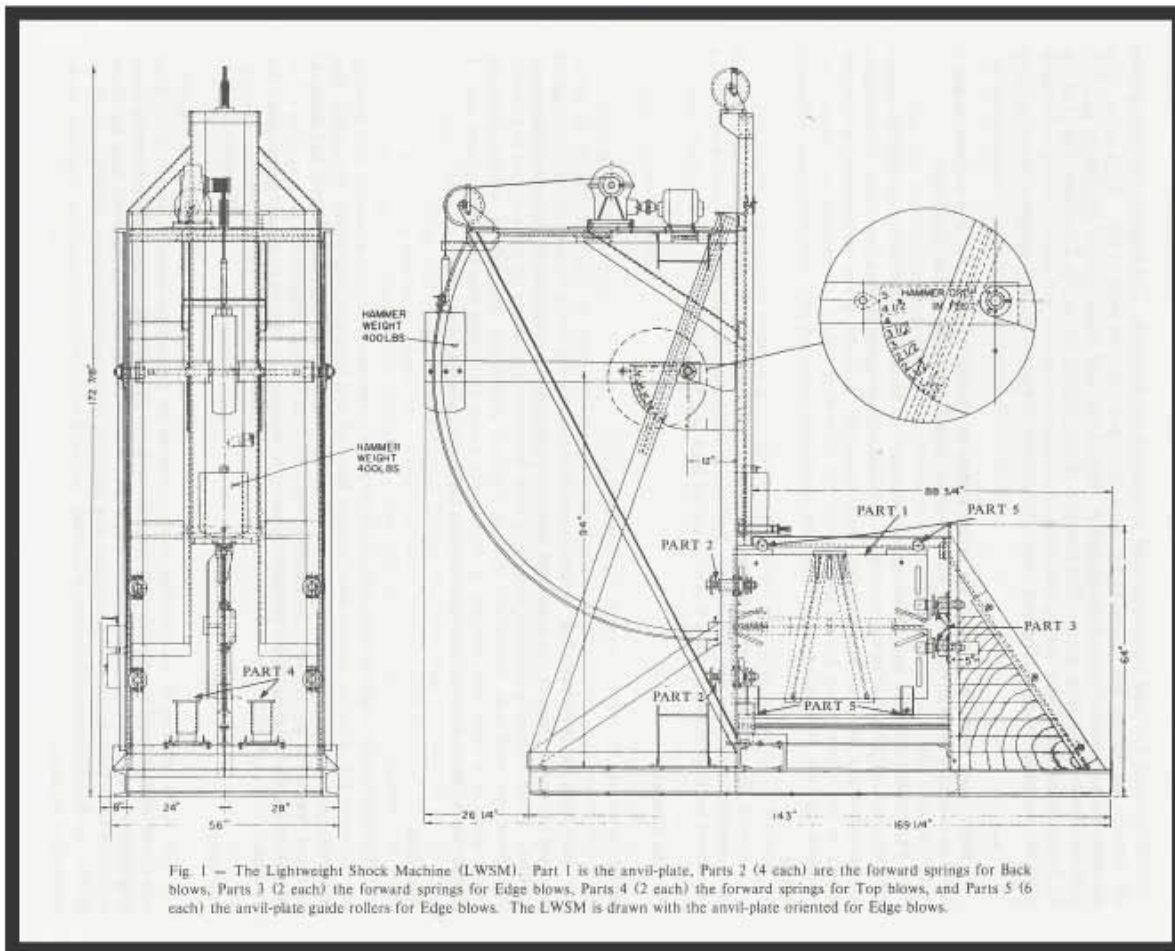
The Lightweight Shock Machine (courtesy K. Hurtsough).
